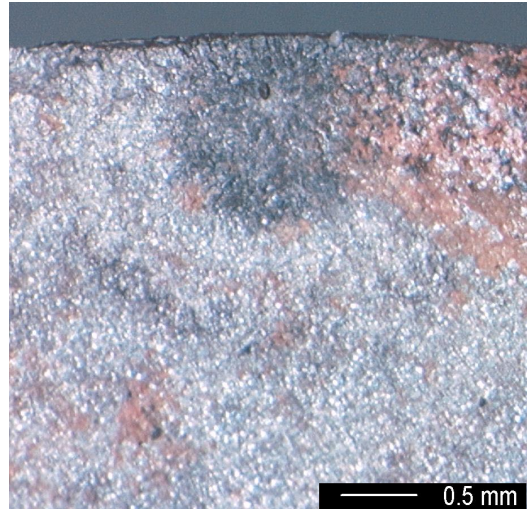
Fatigue fracture of coil spring initiated at non-metallic inclusion [IABG]
